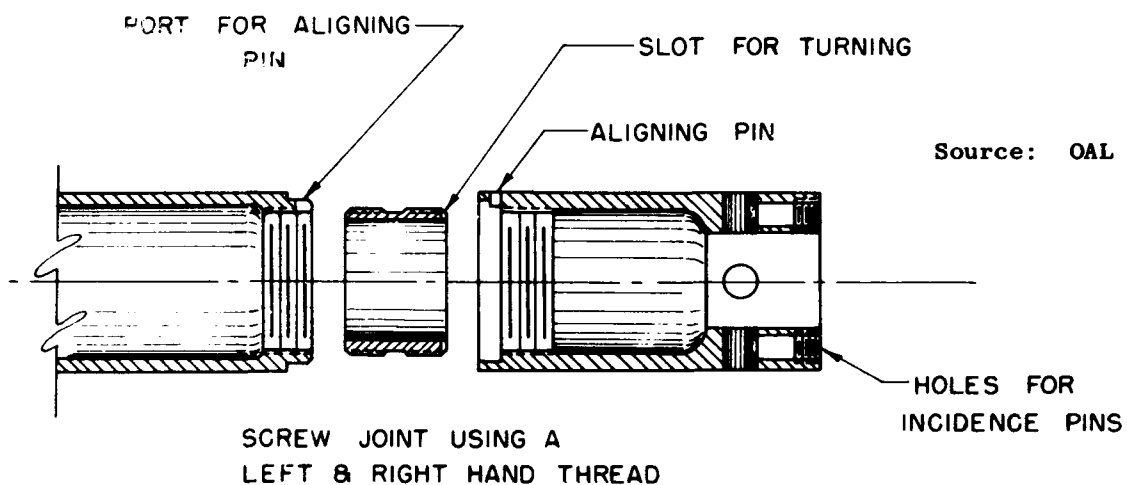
Details of left and right-hand thread in screw-type joint.
